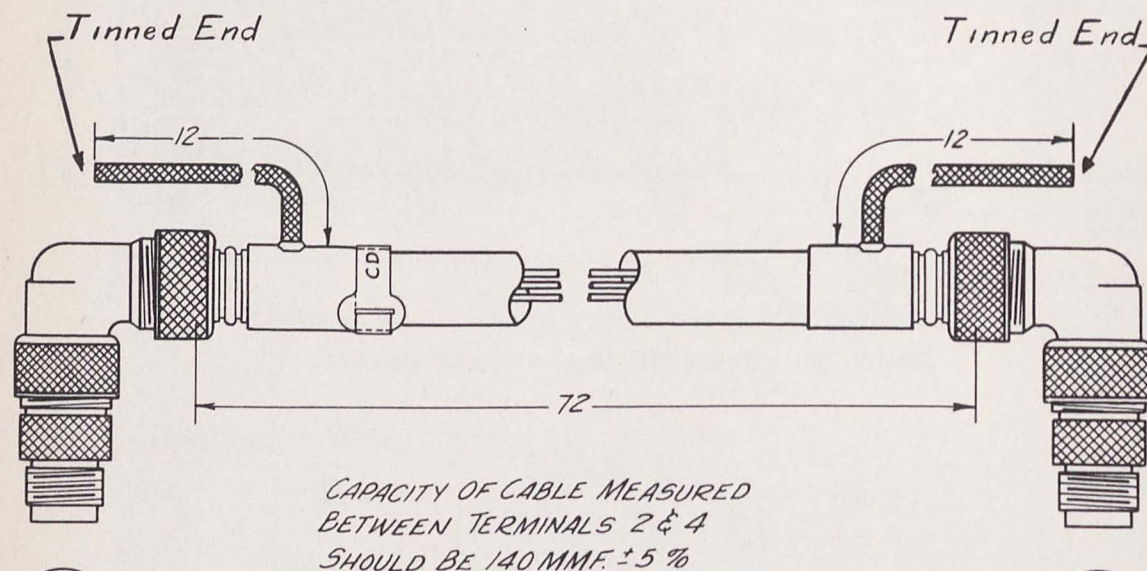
COUPLING MC-203, OUTLINE DRAWING
